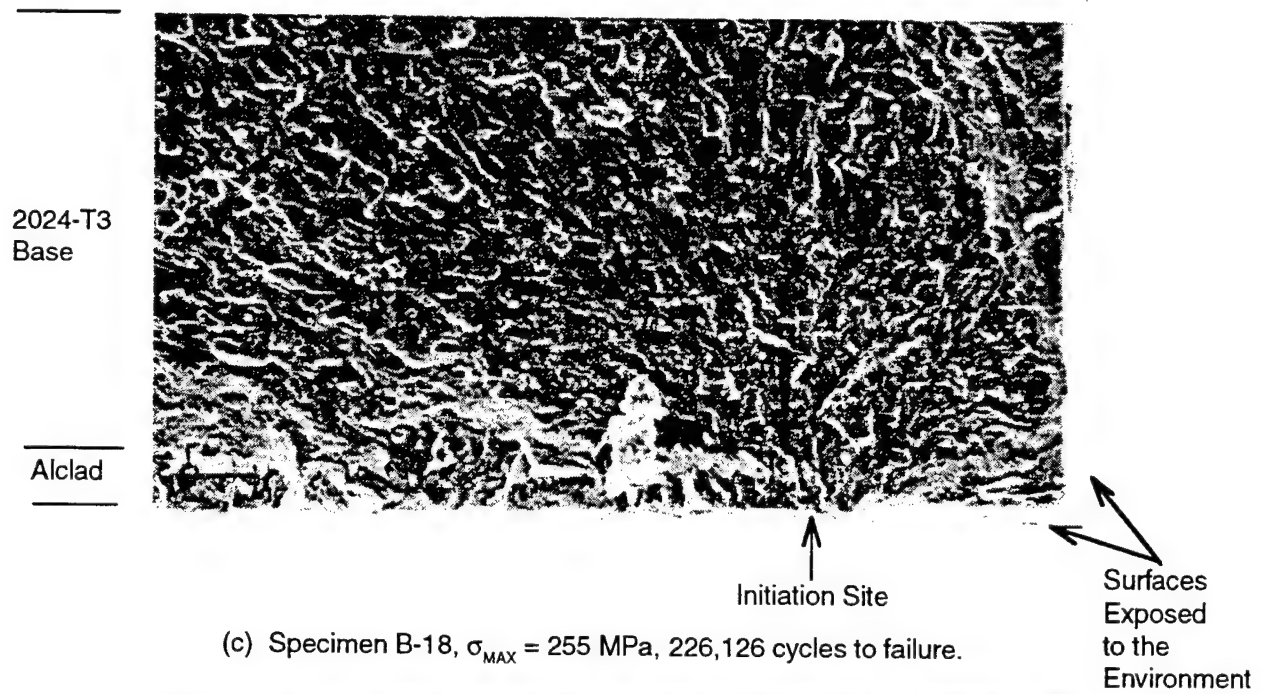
FRACTURE SURFACE APPEARANCE OF ALCLAD 2024-T3 FATIGUE SPECIMENS TESTED IN VACUUM. (CONCLUDED)
